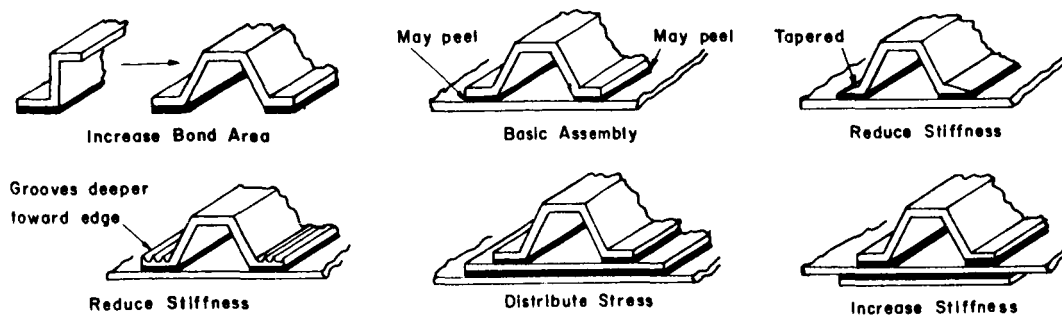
JOINT DESIGNS FOR HAT-SECTION SKIN-AND-STRINGER CONSTRUCTION
